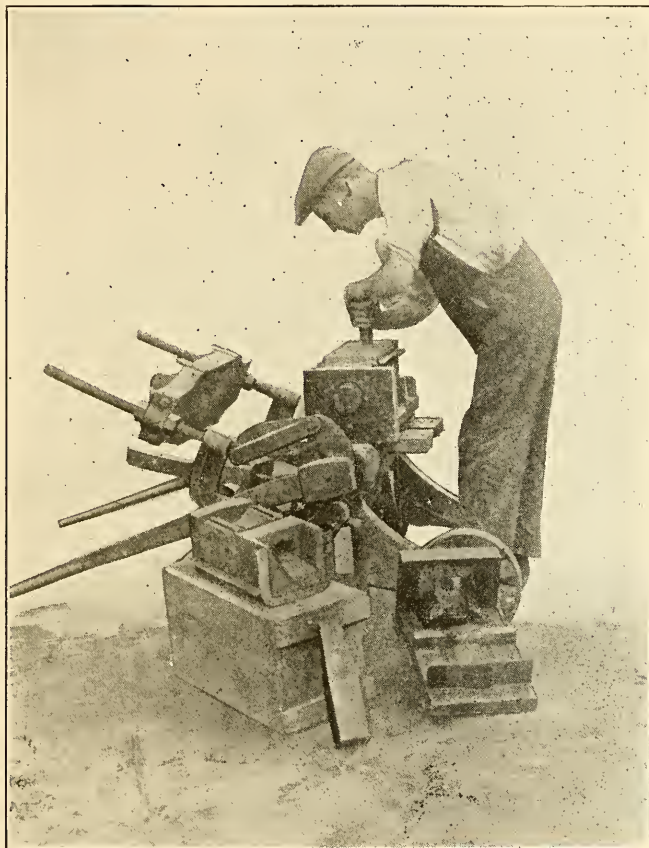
Cutting Heating Gate in Mold. Finished Mold and Wooden Pattern Shown in Foreground.
